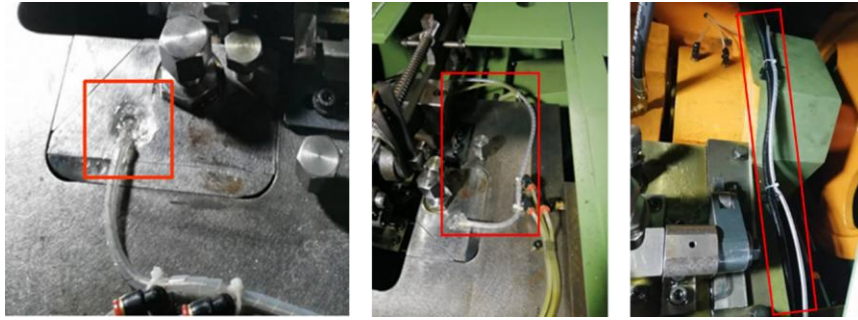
Reinforcement and Isolation at the Drilled Installation Site, Outer Wiring Protective Sleeve, and Cable Routing
